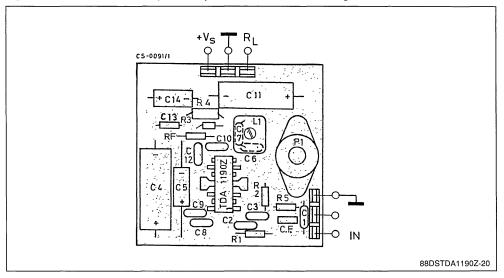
P.C. Board and Component Layout of the Circuit Shown in Fig. 16.
